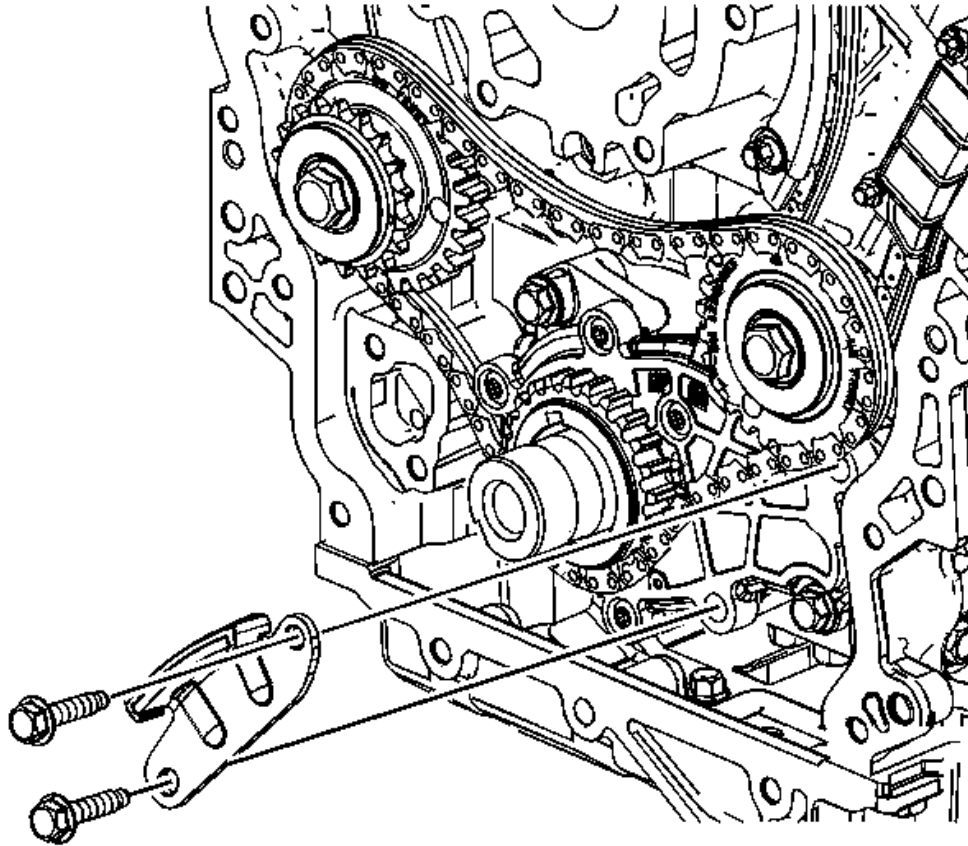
Primary Camshaft Drive Chain Lower Guide
